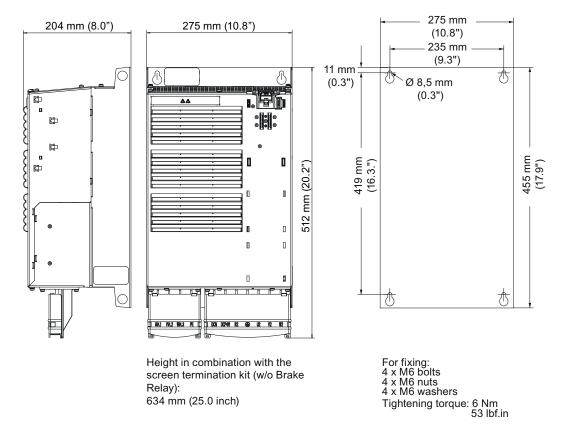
Dimensions and drill pattern for Power Module PM240, FSD, IP20, with integrated filter class a
